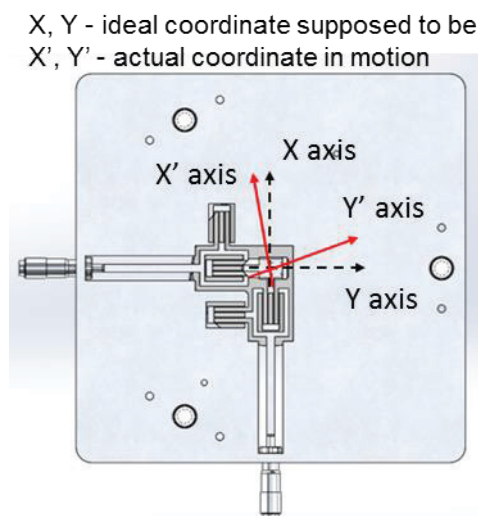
Schematic drawing for the single-chip stage parallelism
